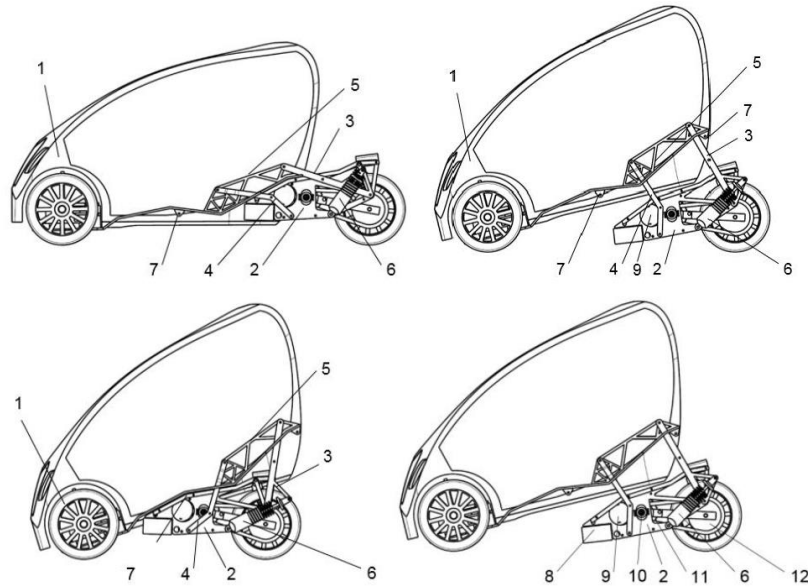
EvoCare modes and components: cabin (1), propulsion module (2), linkages (3 and 4), main carrier (5), spring and damper (6), spots for fixation (7), battery (8), electric traction motor (9), gearbox (10), drive belt (11), rear wheel (12). [39]
